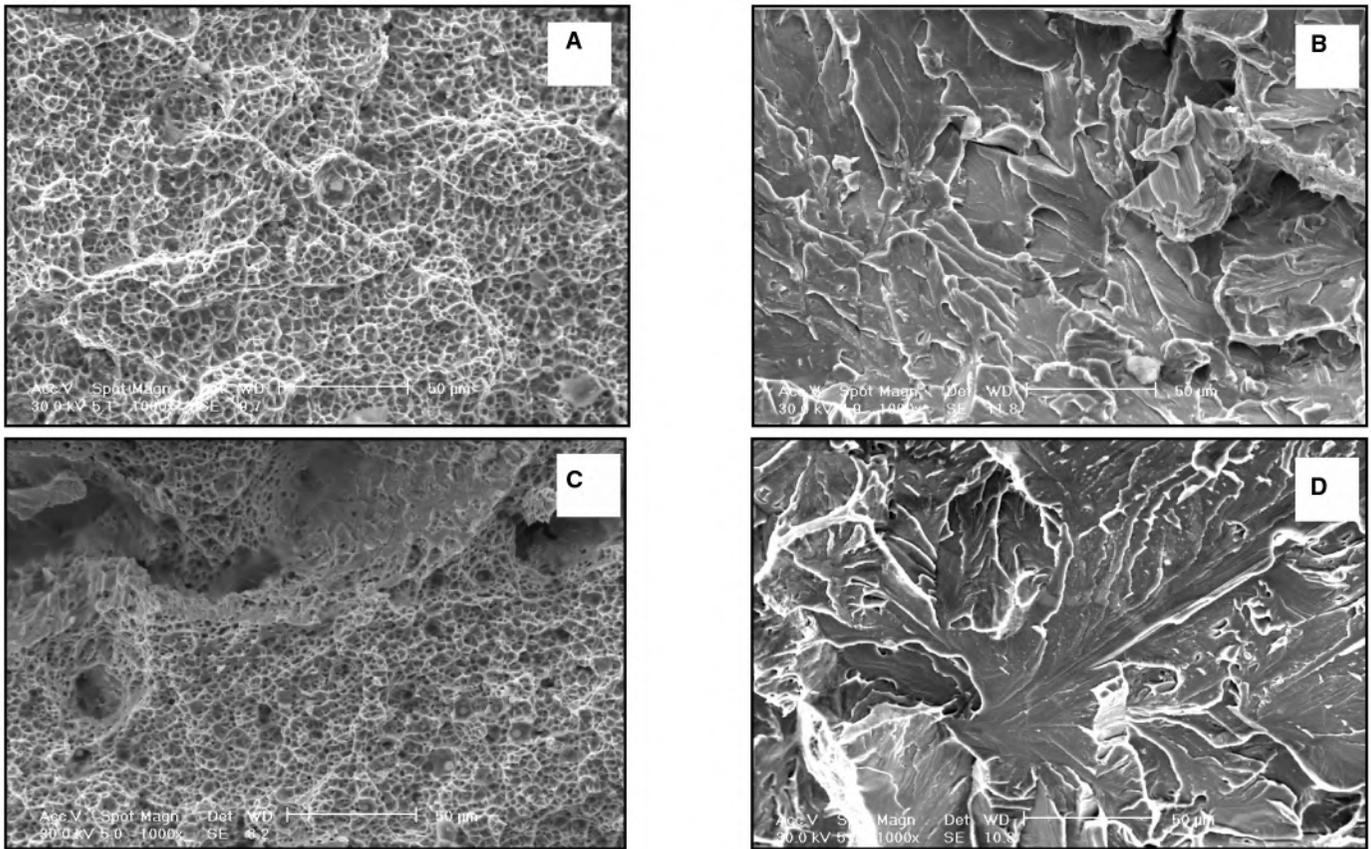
SEM fractographs of the CTOD samples. A and C — Weld metal; B and D — weld interface from the 12Cr side of SMA and SA welds, respectively.
